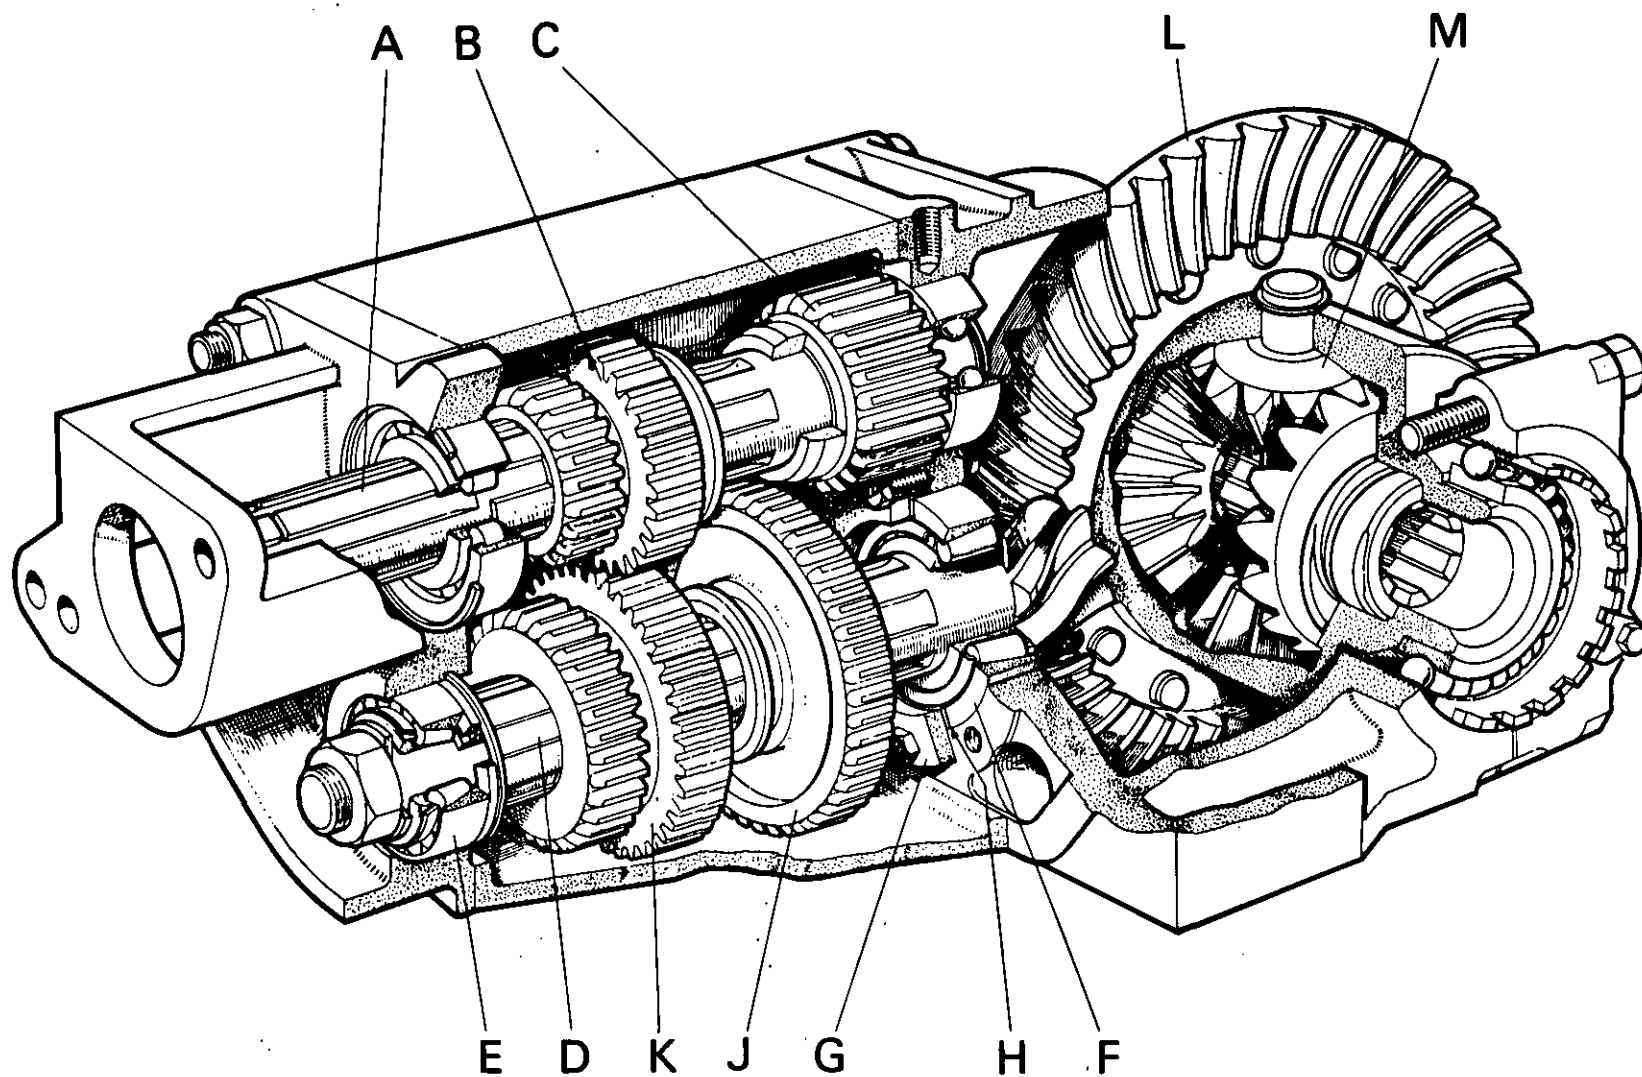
SIX-SPEED GEARBOX — 1200 TRACTORS
